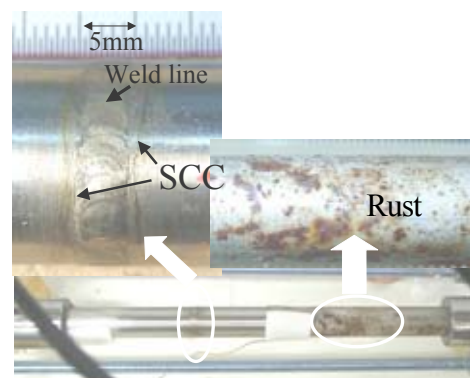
SCC damaged butt-weld 304 pipe
